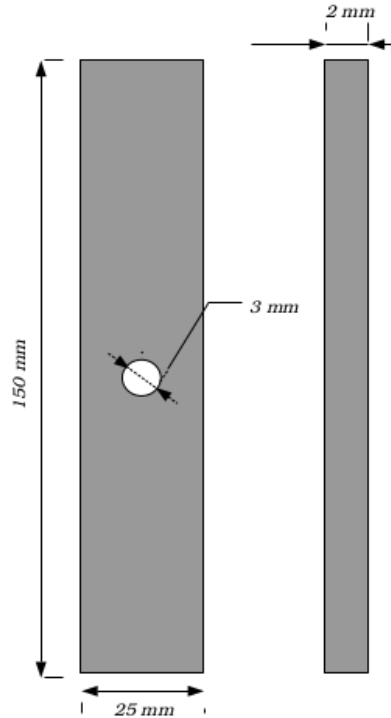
Dimensions of the used ± 45 Carbon Epoxy specimen.
